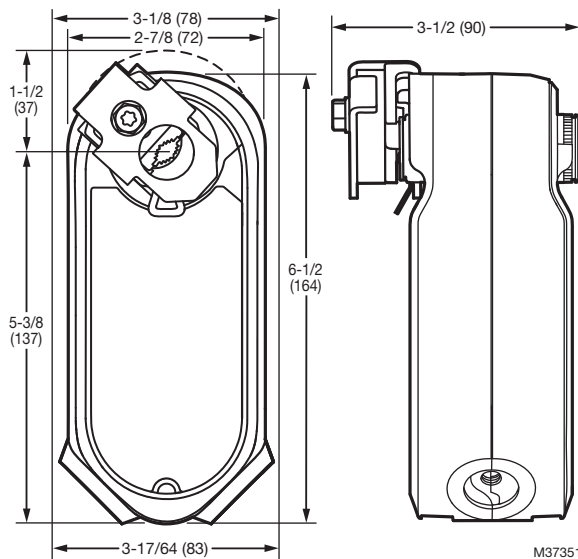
Dimensional drawing of actuator without conduit in in. (mm).
